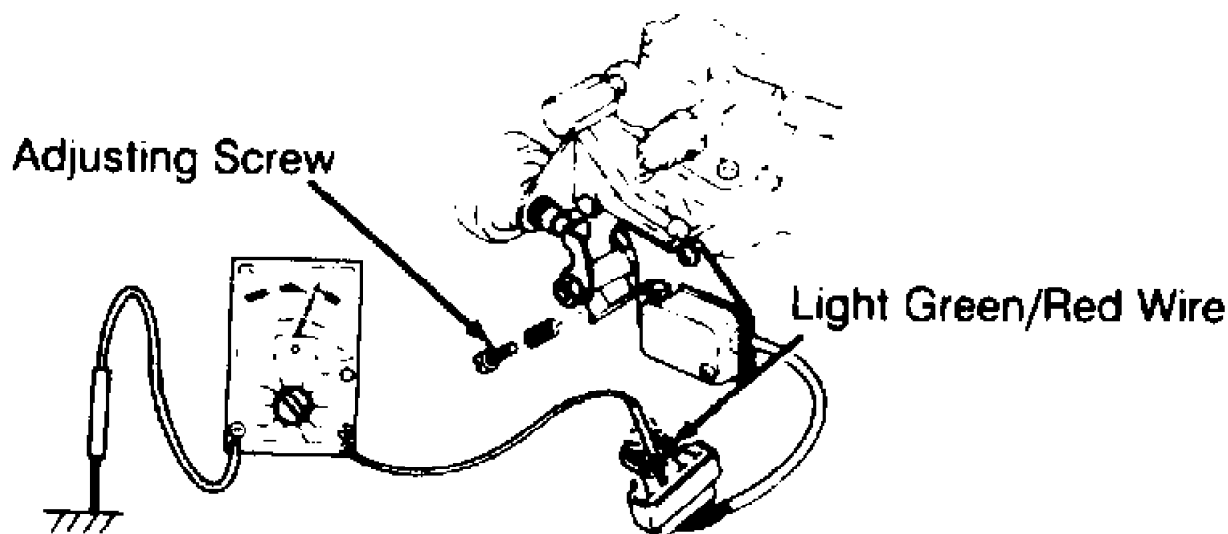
B2200 Carbureted Adjusting Throttle Switch
